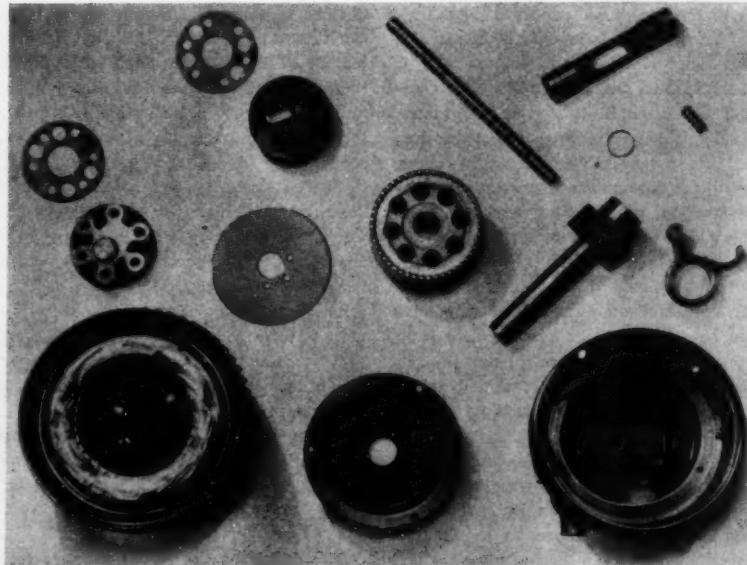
GIBSON HERMETIC COMPRESSOR ASSEMBLY PARTS
